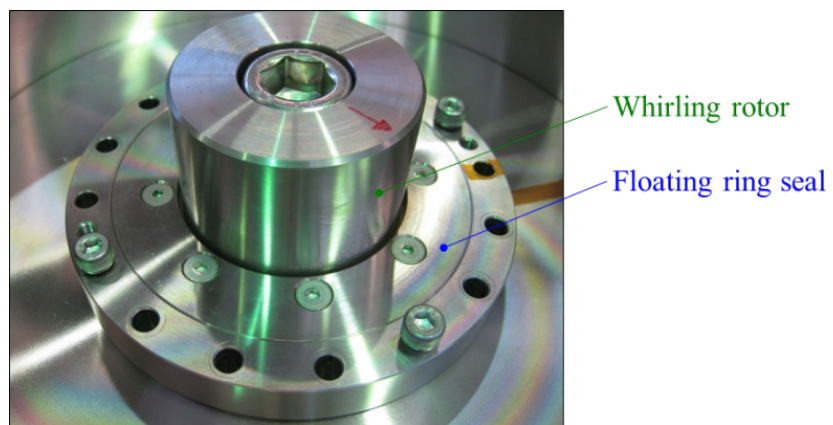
FRS-inlet side view of the preassembly whirling rotor and FRS
